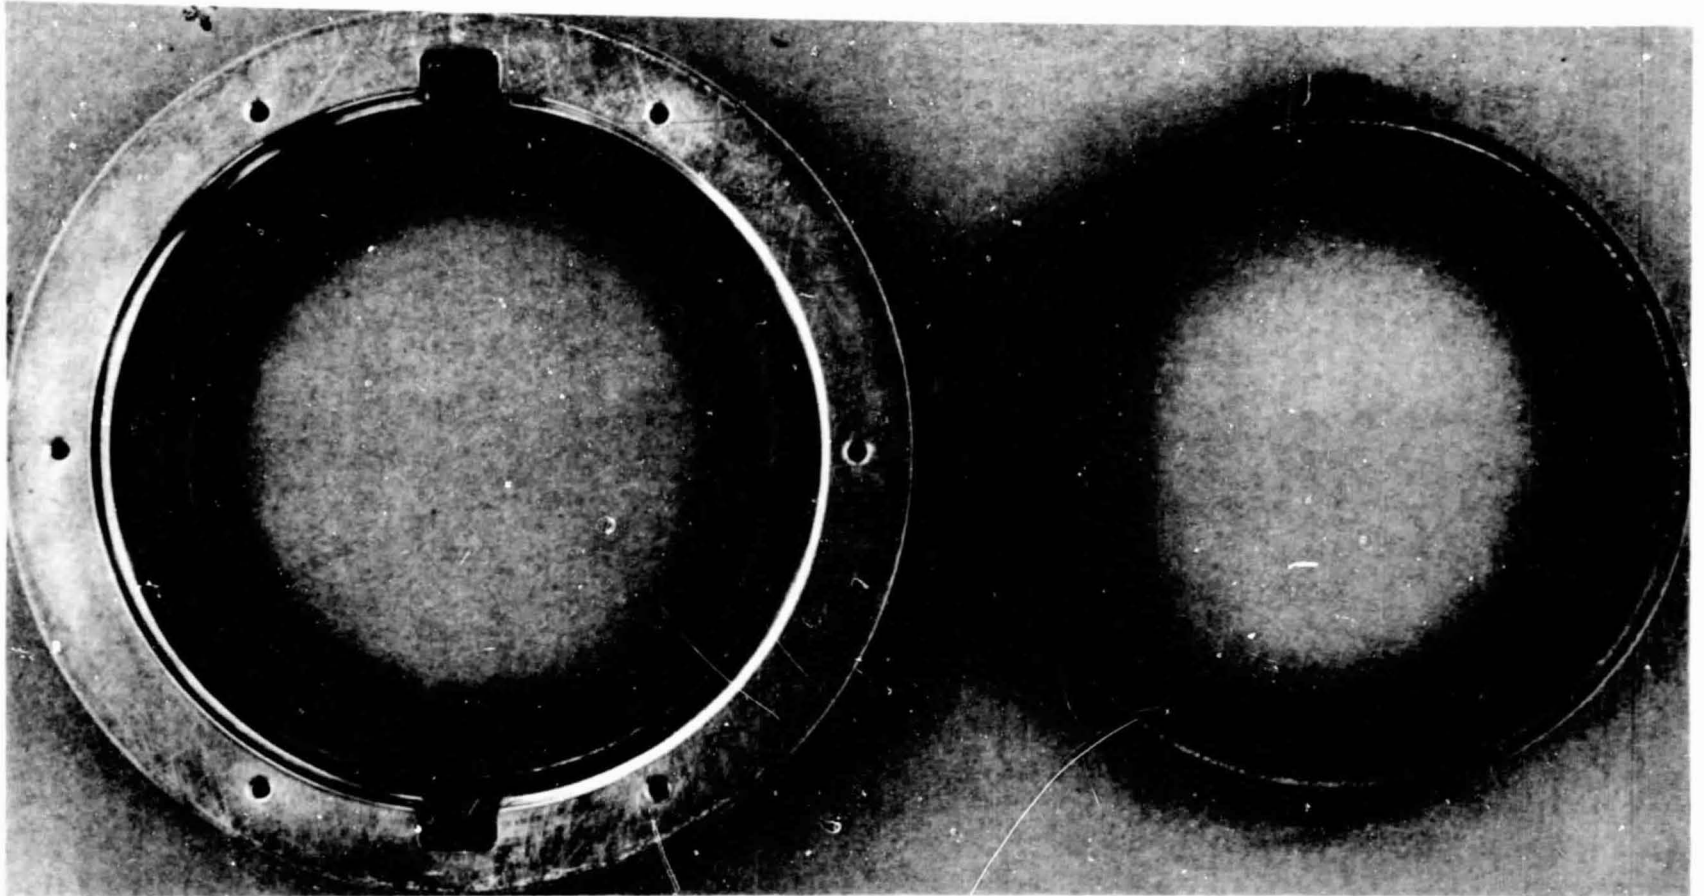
Turbine End Secondary Seal, P/N 7R0011526, S/N 047907, Build 15,
